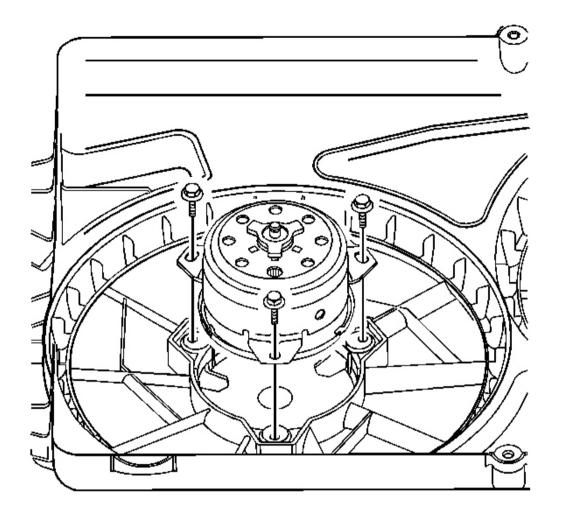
View Of Fan Motor Screws From The Fan Shroud Courtesy of GENERAL MOTORS CORP.
